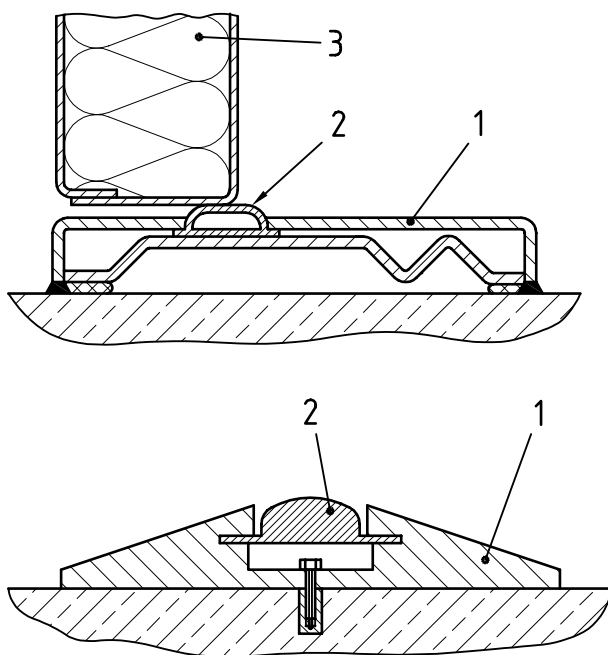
Example of connection of enclosure wall and corner elements by extended profiles with adjustable elements
